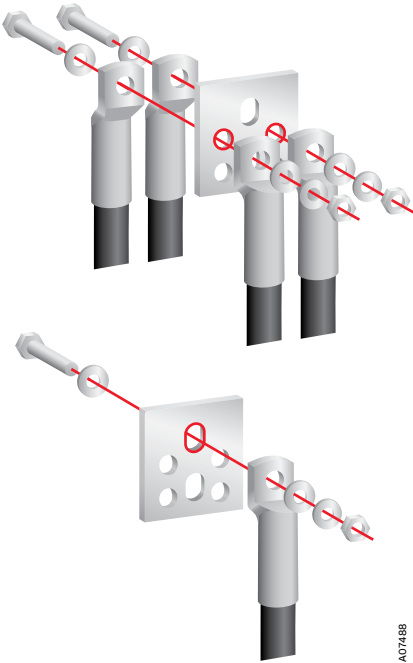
OX_800U...1600, wiring / cable lugs
